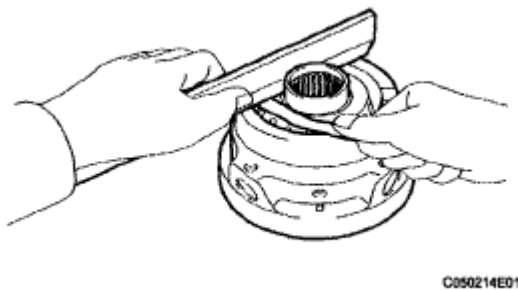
Measuring Clearance Between Front Differential Case And Front Differential Side Gear
